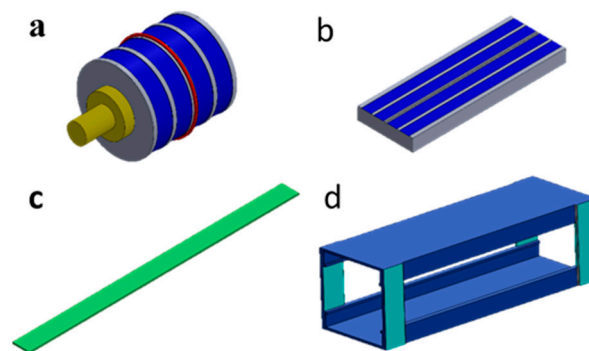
Model of components: (a) pinion; (b) rack; (c) flexible strip; (d) casing.
